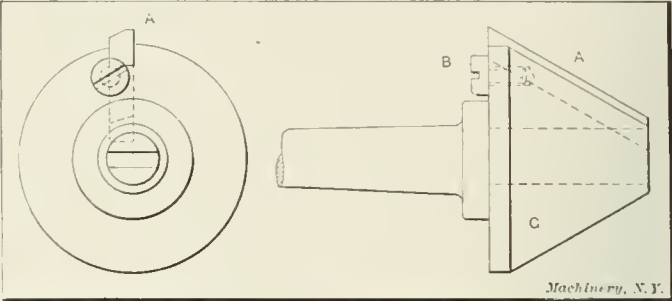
View showing Principle of Combined Centering Tool and Cone Center
